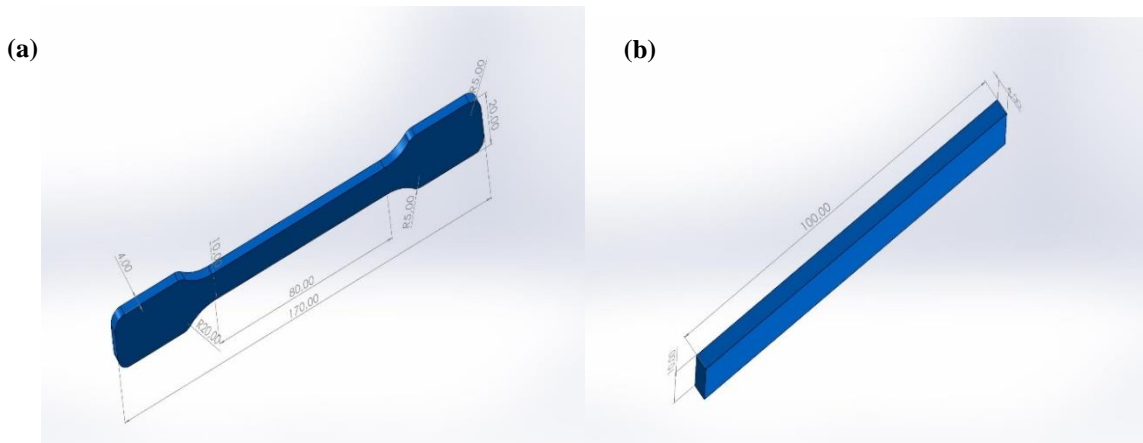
Shapes and dimensions of (a) tensile and (b) three-point bending specimens.
